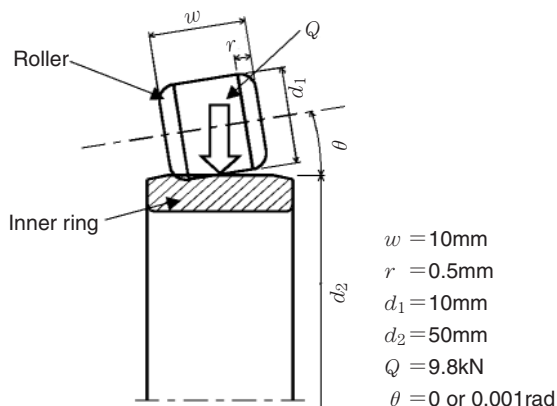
Schematic drawing of a roller and an inner ring used in contact pressure calculation
